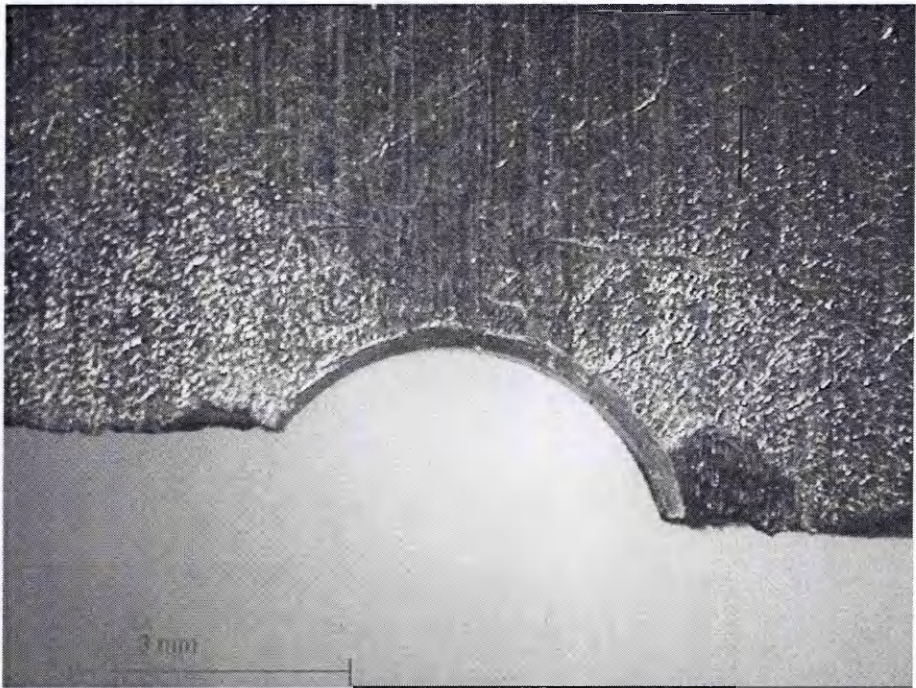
Lateral fracture surface from testing configuration 1 (Table 6.1.1)
